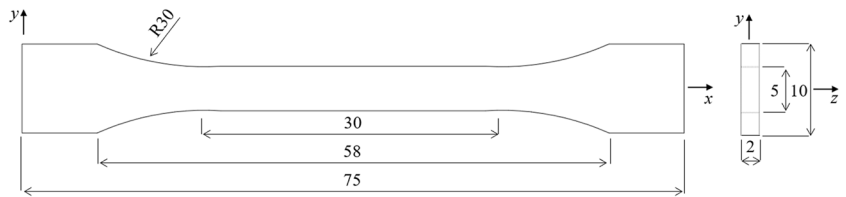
Test specimen for mechanical analysis (dimensions in mm)
